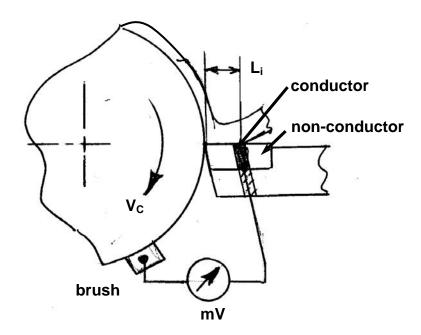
Compound rake used for measuring cutting temperature along rake surface
